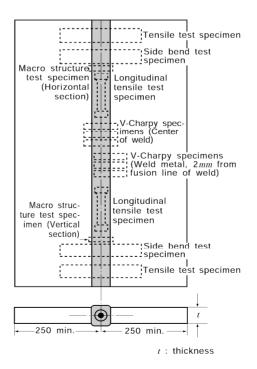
Butt Weld Assembly (Electro-slag and electrode-gas welding, Unit : mm)
